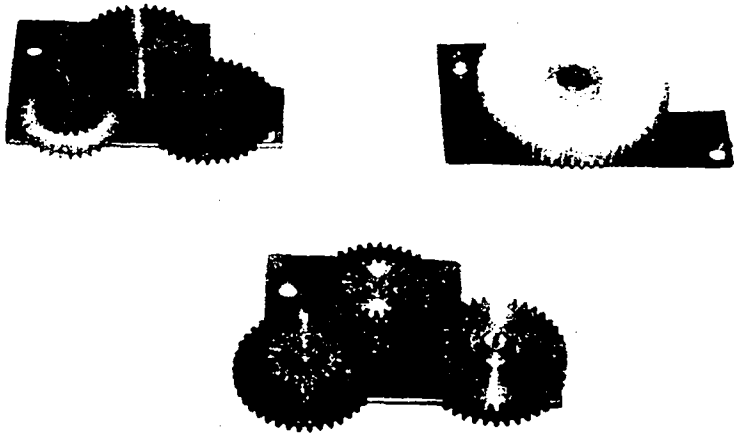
Metering Gears Showing Assemblies for Three Particular Volumes
